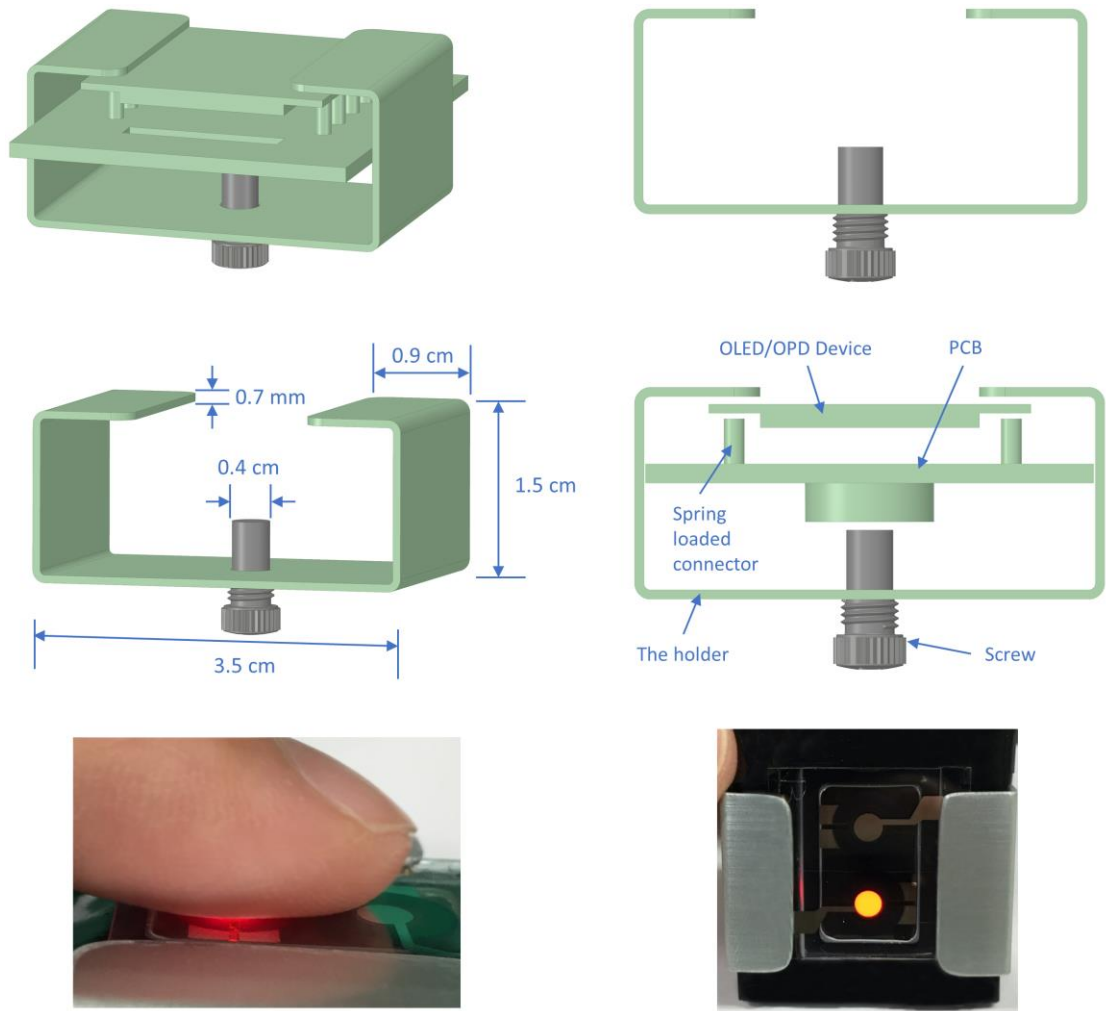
The illustration and dimensions of the proposed pulse meter holder that used to fix the parts together.
